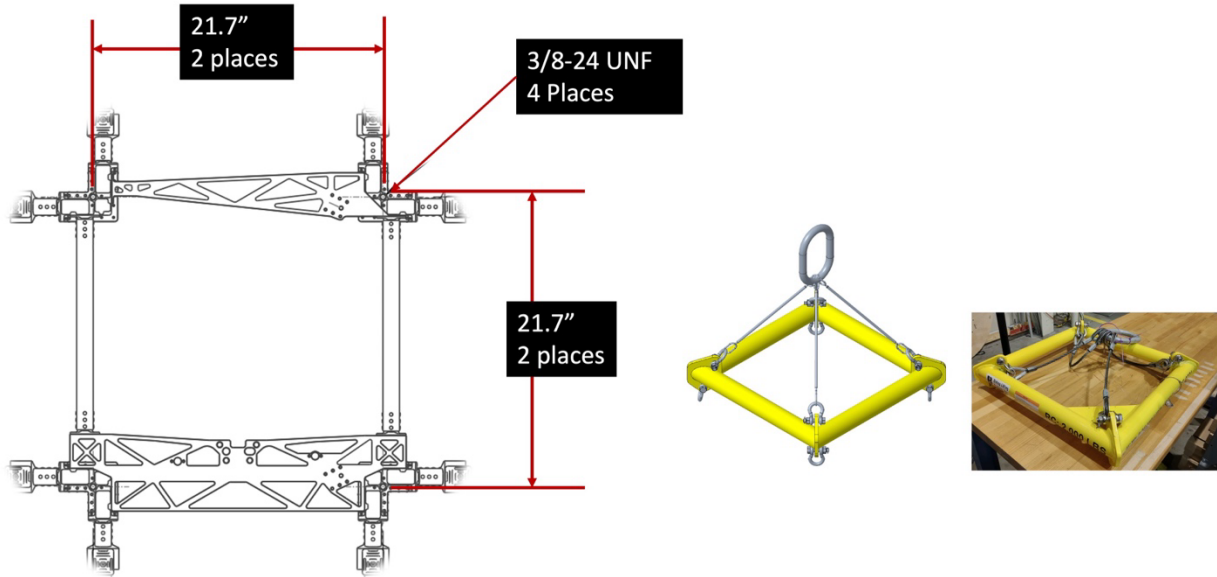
VIPER Four-Point Lift Fixture and attachment points on VIPER Rover (Top View)
